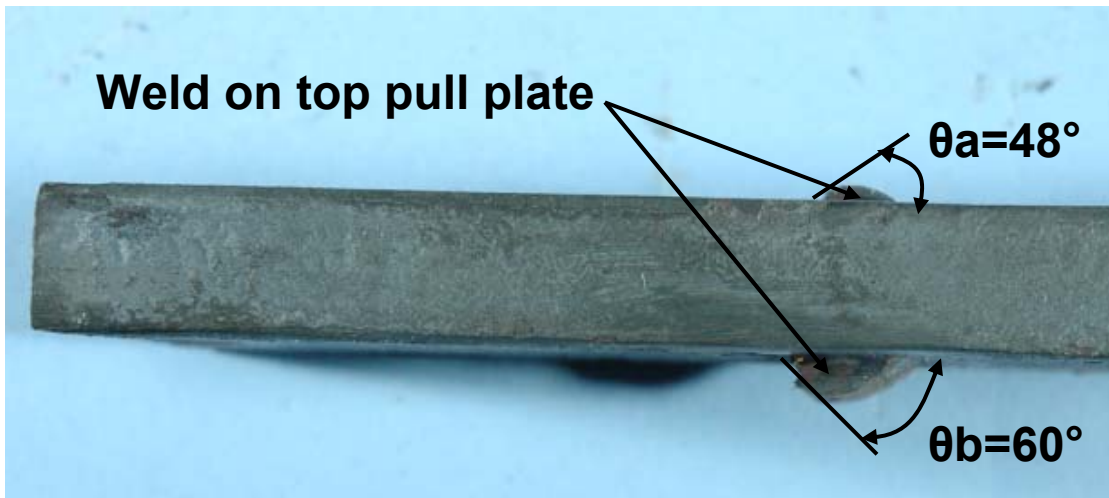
Photograph of a side view Specimen P4, where the profile of the fractured weld on the top pull plate is visible
